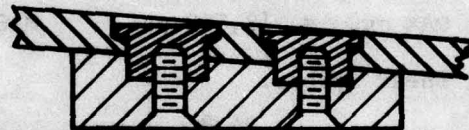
Brake Key to Wheel Attachment Configuration (Sheet 2 of 2)
